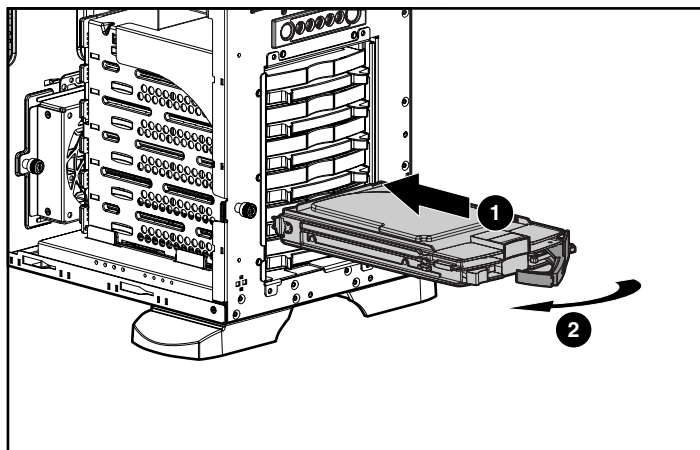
Inserting the hot-plug hard drive and closing the ejector lever
